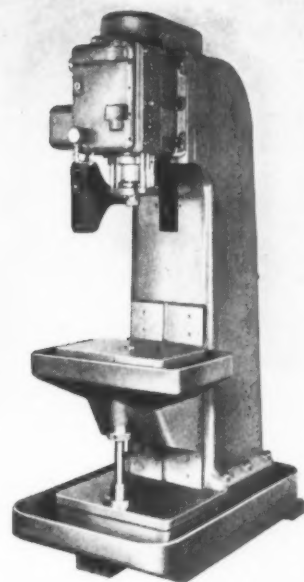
LeMaire Vertical Drilling Machine with Hydraulic Feed
